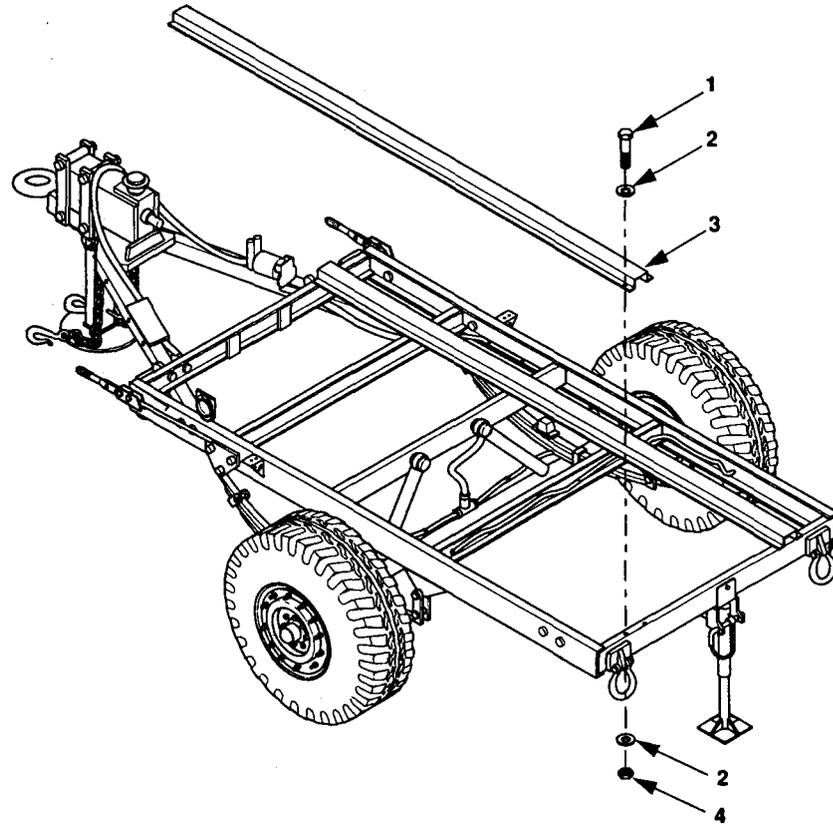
Replace PU-797 Generator Mounting Rail.
